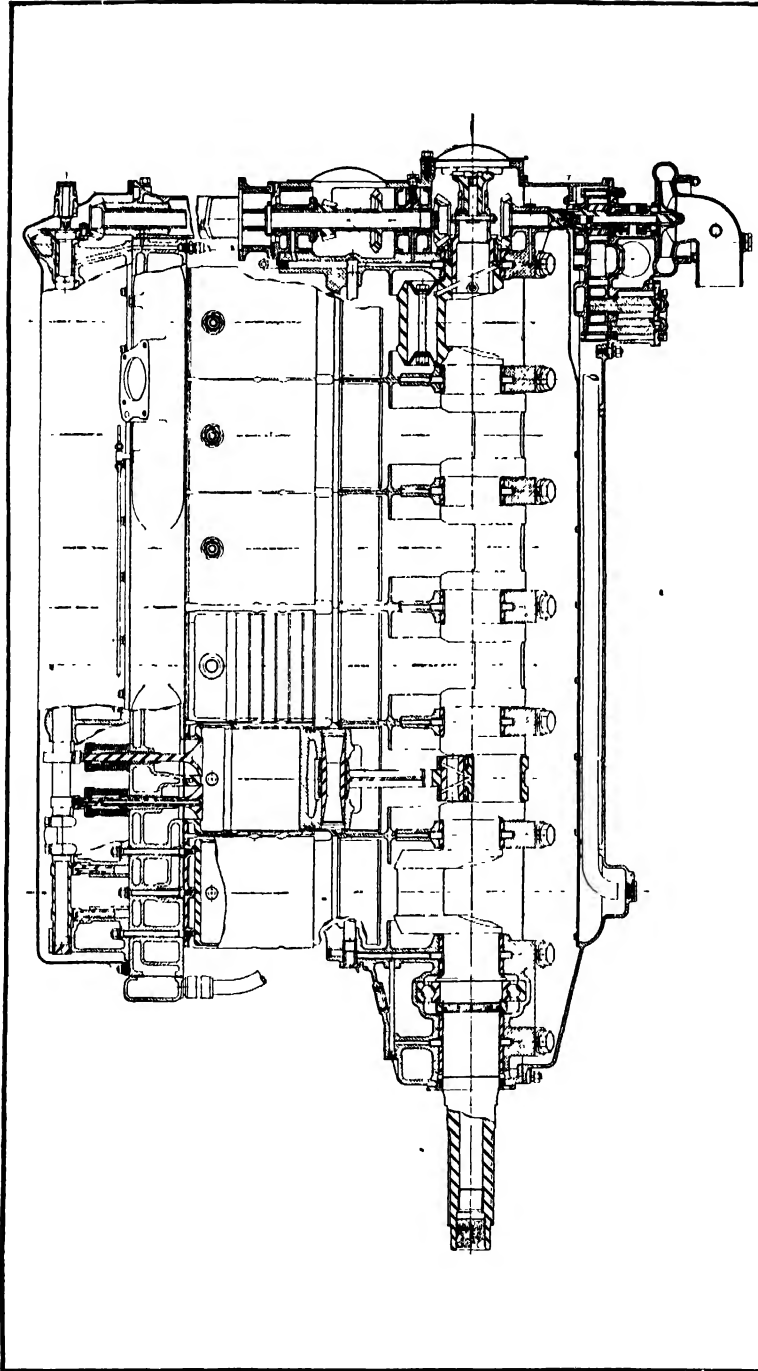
Longitudinal Section through Packard Aircraft Engine Model 2A—1500 Direct Drive, Showing Cylinder Construction and Method of Valve Actuation by Overhead Shaft.
